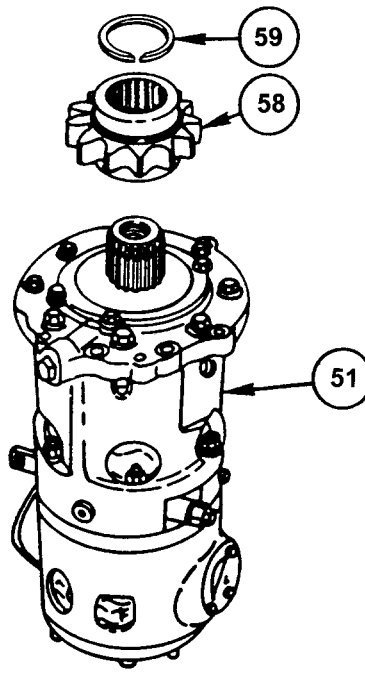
13-Tooth Hydrostatic Drive Gear. (Repeated)
